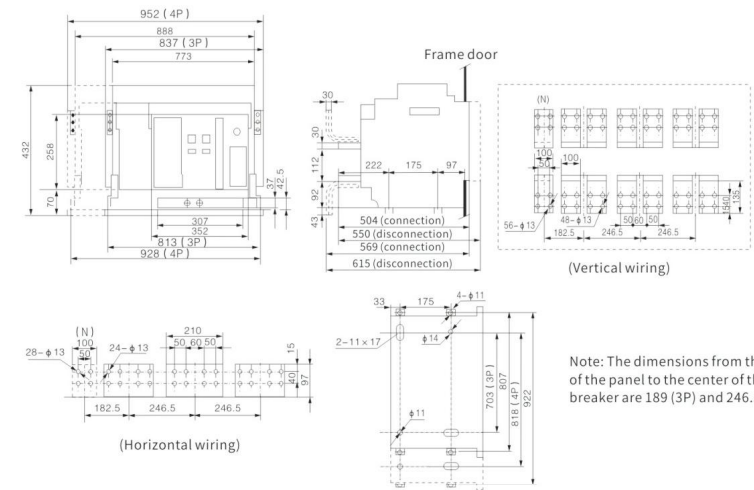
Outline and installation dimension of the draw-out type circuit breaker (W1-6300/3, 6300/4 In=4000A, 5000A)
